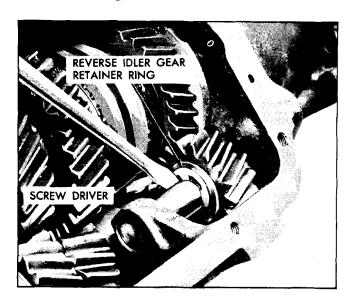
A-18 Removing Reverse Idler Gear Retainer Ring
